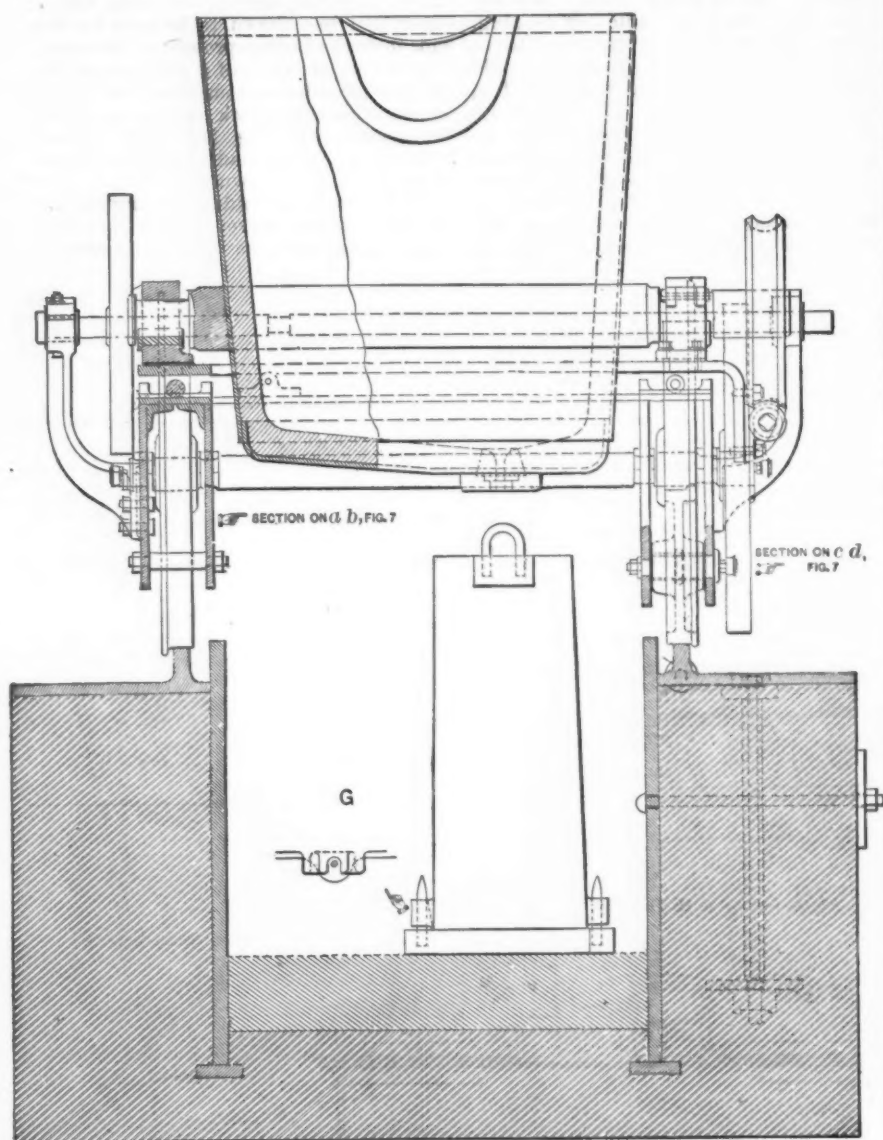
Elevation and Vertical Half Section of 12-Ton Casting Ladle and Car.
